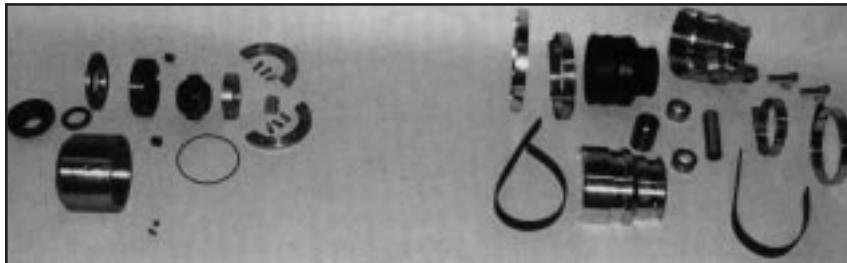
Gear type and sealed pin-type universal joints in comparable sizes
